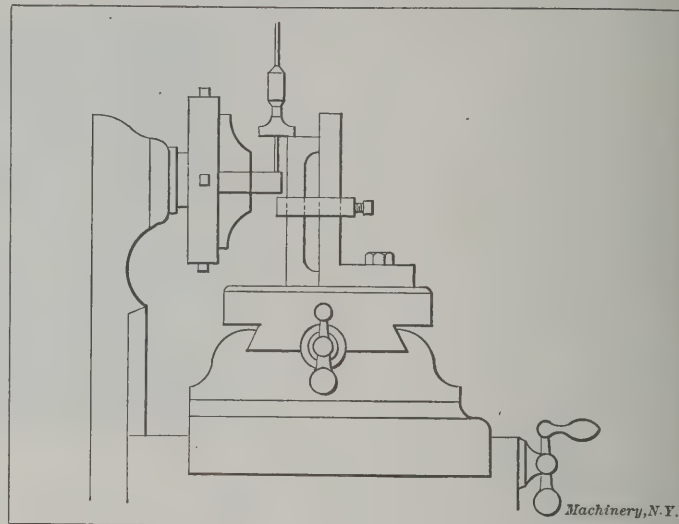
Setting Jig-plate by measuring to Turned Plug with Depth Gage
